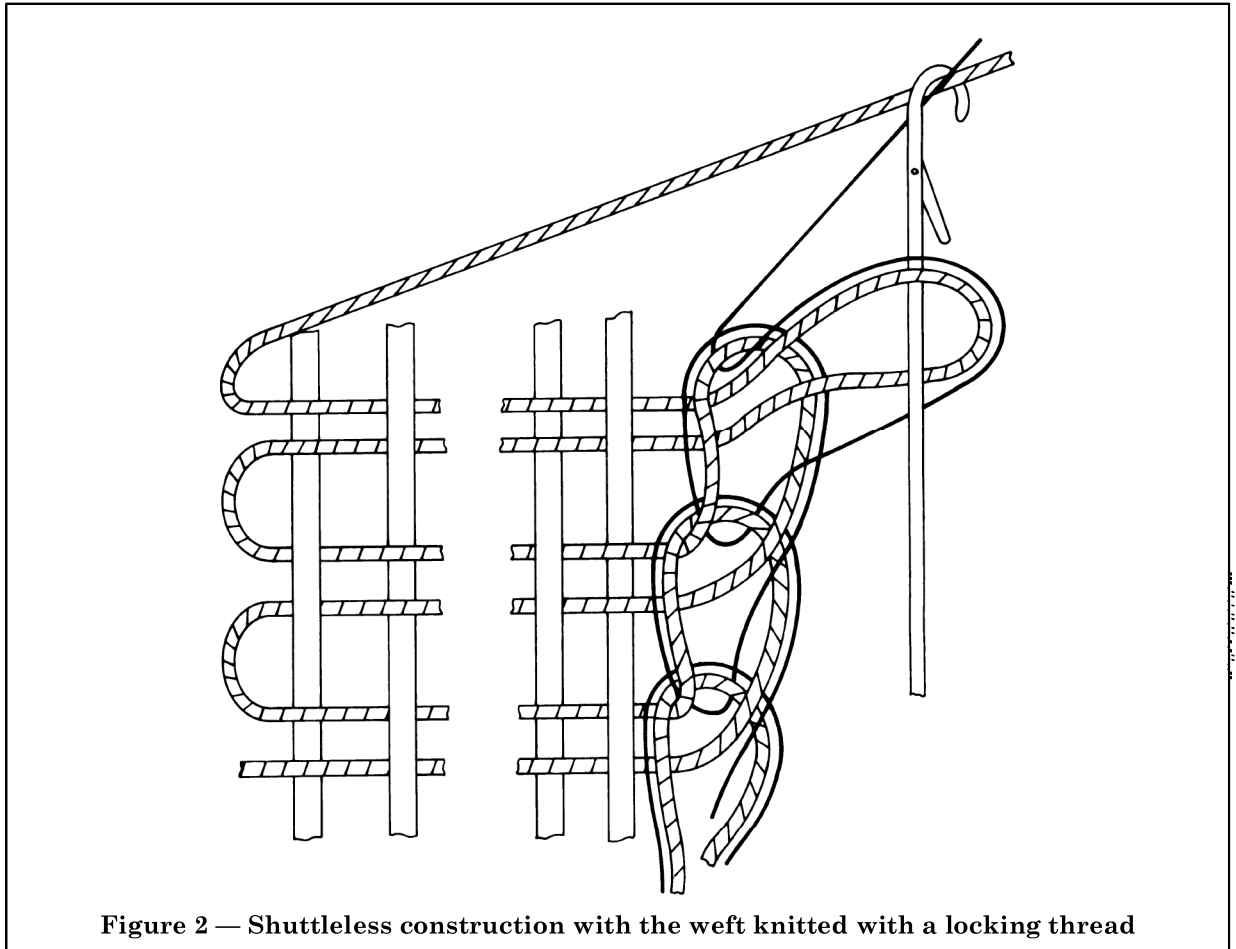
Shuttleless construction with the weft knitted with a locking thread
